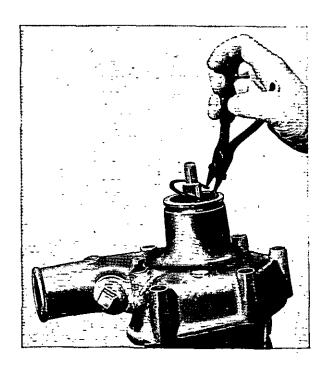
Removing Bearing Retaining Circlip. (Low Position Type Water Pump).
